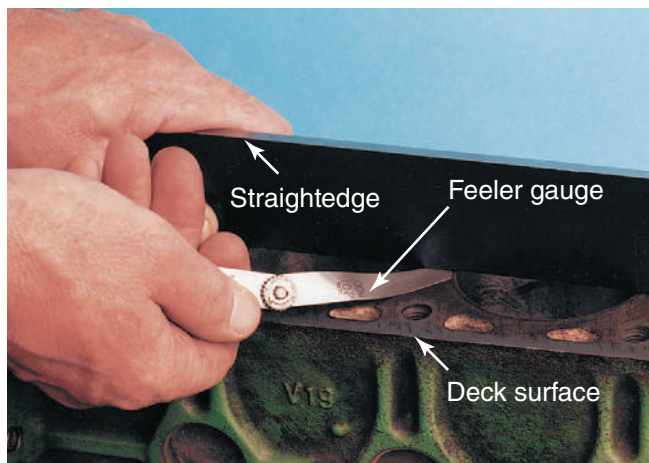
Using a feeler gauge and precision straightedge to check for warpage.
